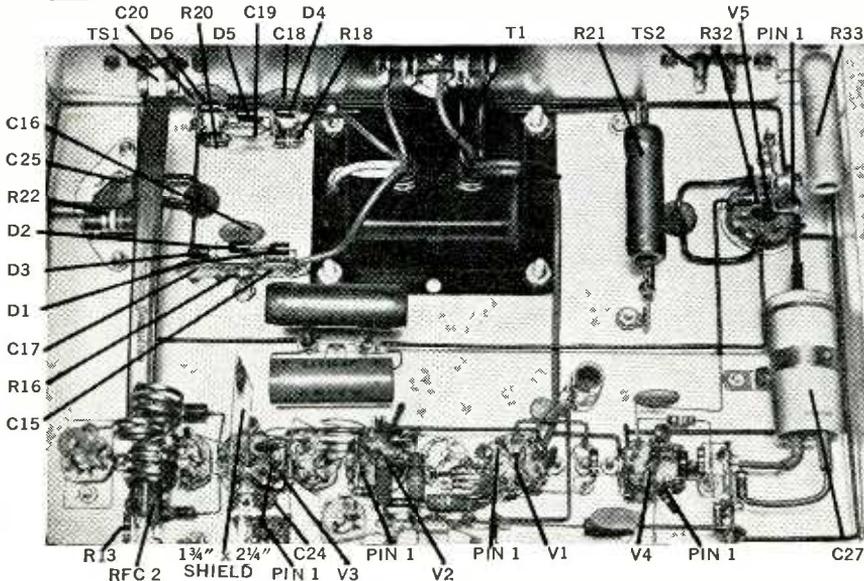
An overall view of the chassis bottom looking from front to back. In building unit, it is essential that tube sockets be oriented as shown and coils positioned correctly.
